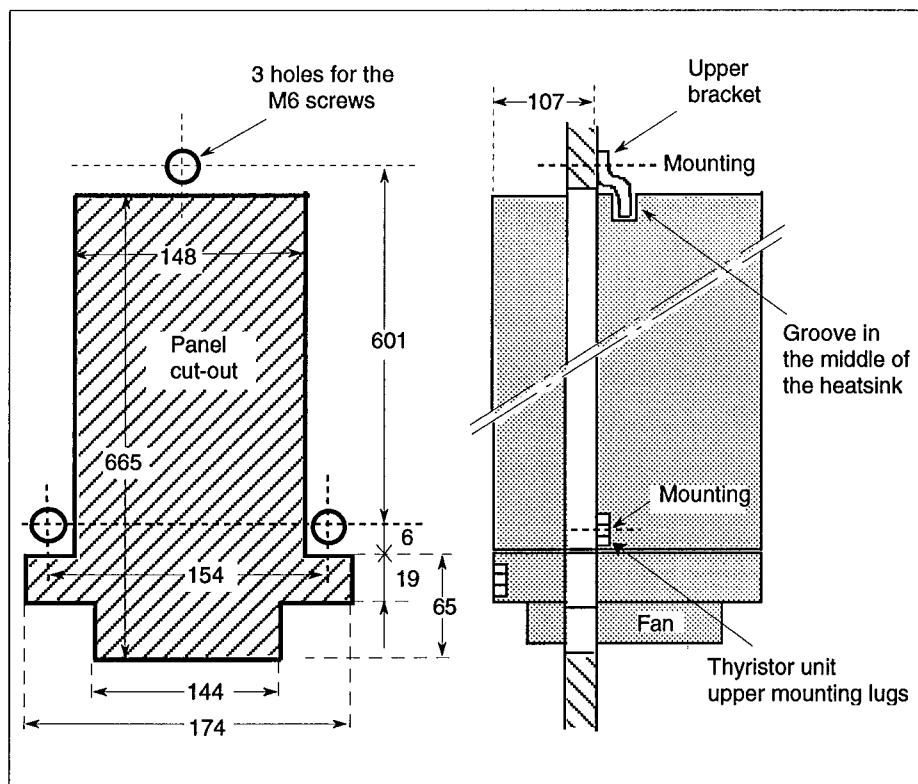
TU1470 thyristor unit drilling, cutting and mounting values (in mm)
